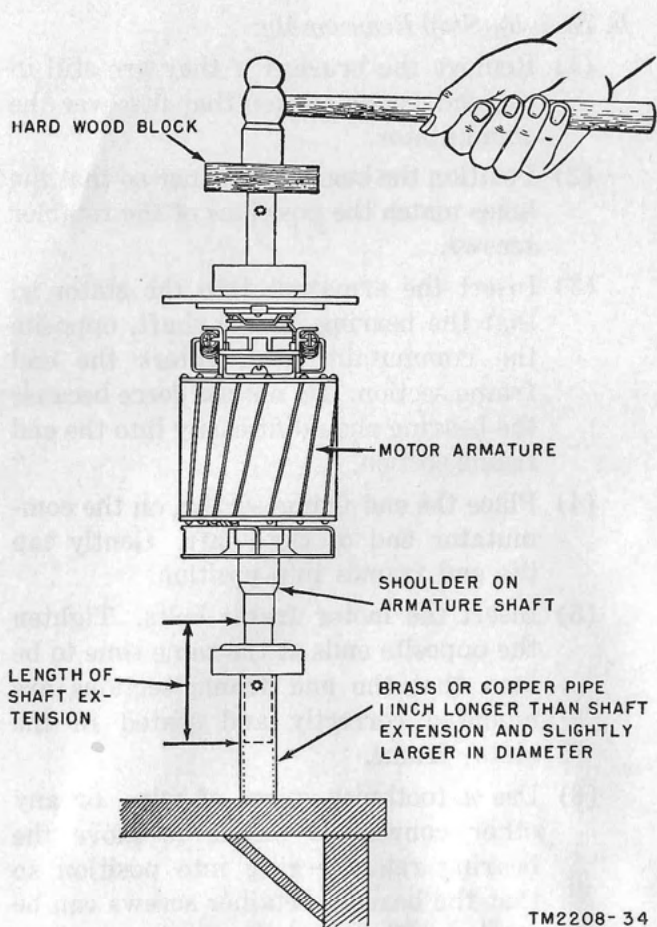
Mounting bearings on the armature shaft by use of hammer and soft metal pipe.
